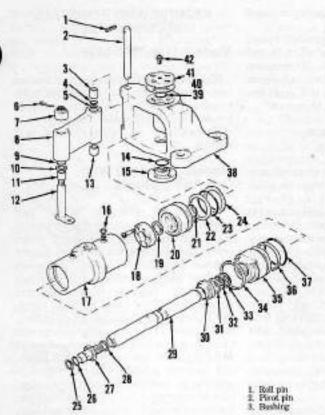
Exploded view of transverse mounted steering cylinder showing compo-nent parts and their relative positions.
